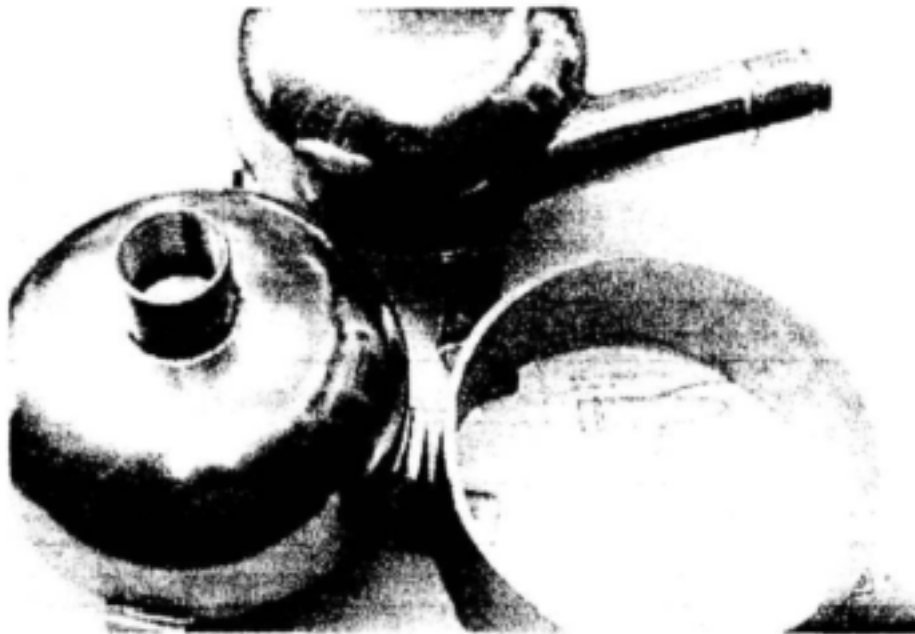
END FLANGES DURING MANUFACTURE.
